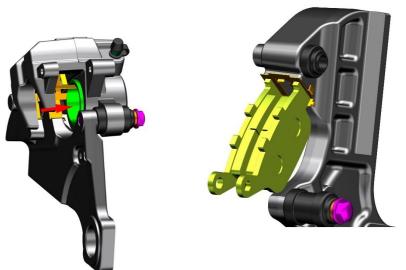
REAR WHELL		Replace the rear brake pads (Double rocker arm)	CHK
